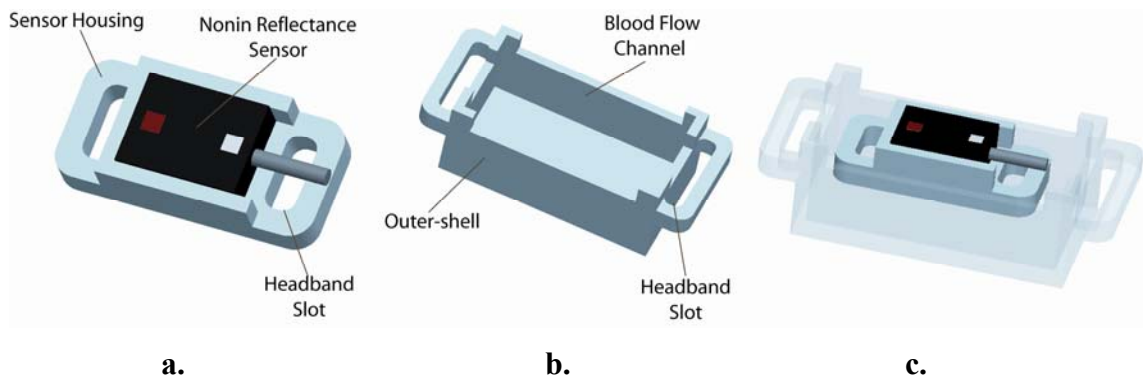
Housing 1 assembly. (a). sensor housing, (b). outer-shell, (c). assembled isolating housing.
